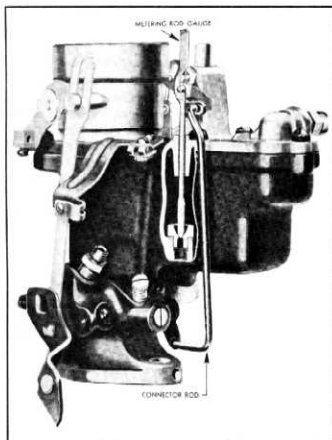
Checking Throttle Connecting Rod with Metering Rod Gauge
